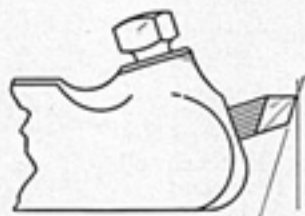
Side View of lathe tool cutter bit ground for cutting screw threads.
